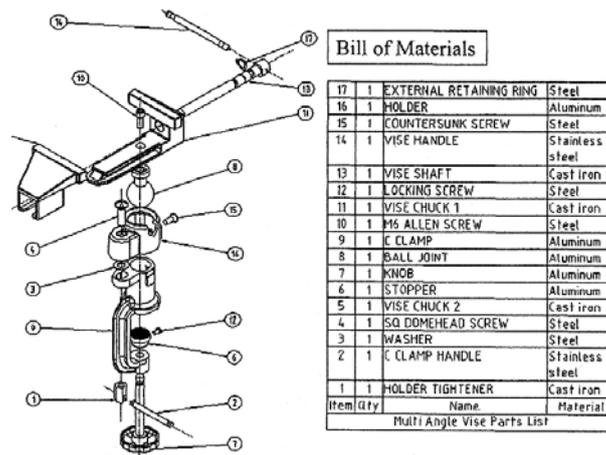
Example of an exploded view used by engineering designers (Tjalve *et al.* 1979b)
